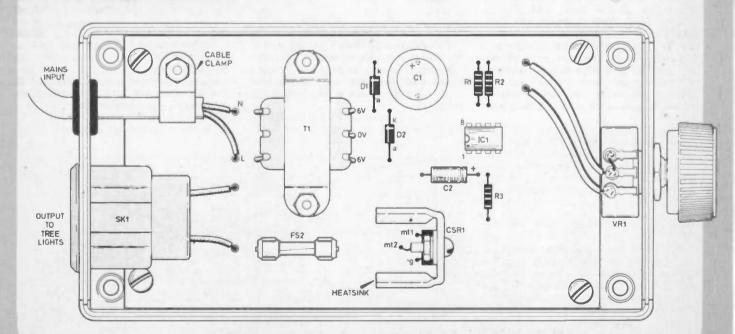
Component layout of the p.c.b. shown mounted in the case with all interwiring shown.
